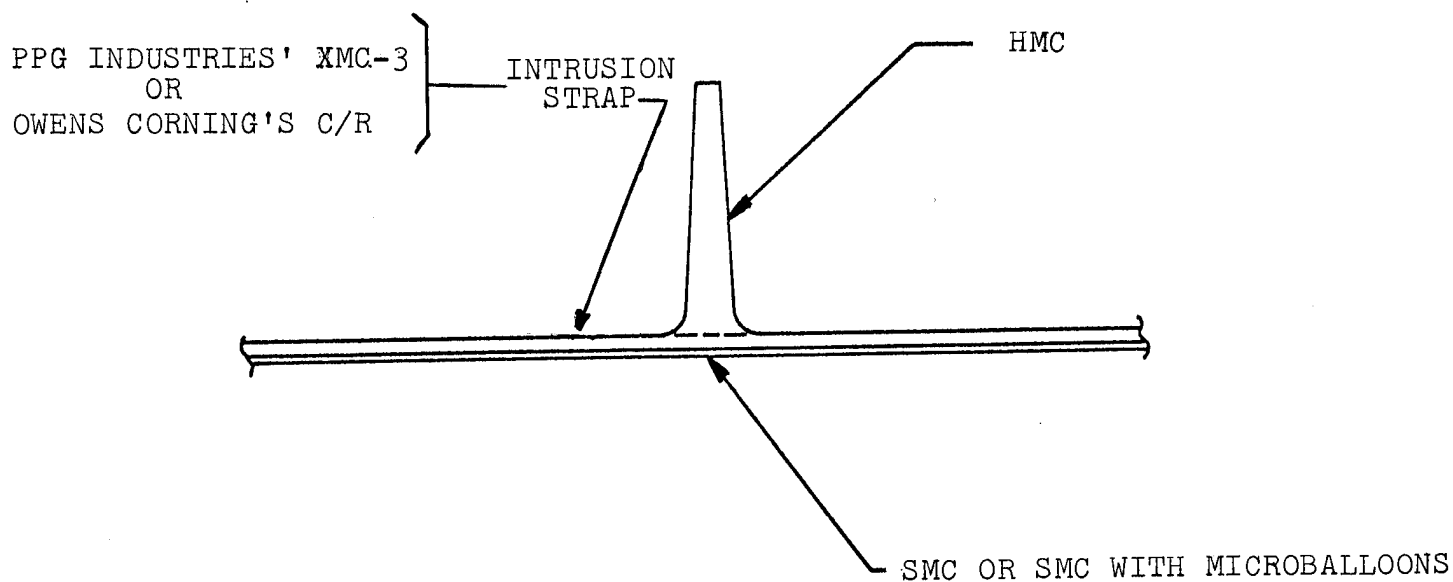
CONSTRUCTION DETAILS FOR DOOR OUTER
